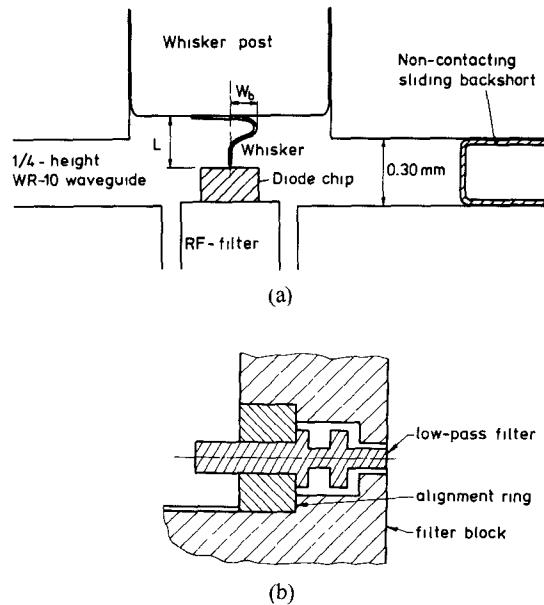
Details of diode, whisker, and RF filter. (a) shows the diode chip on the RF filter contacted with a 12- μm -diam whisker, and (b) is a cross section of the coaxial RF filter which is held by a Macor dielectric ring.
